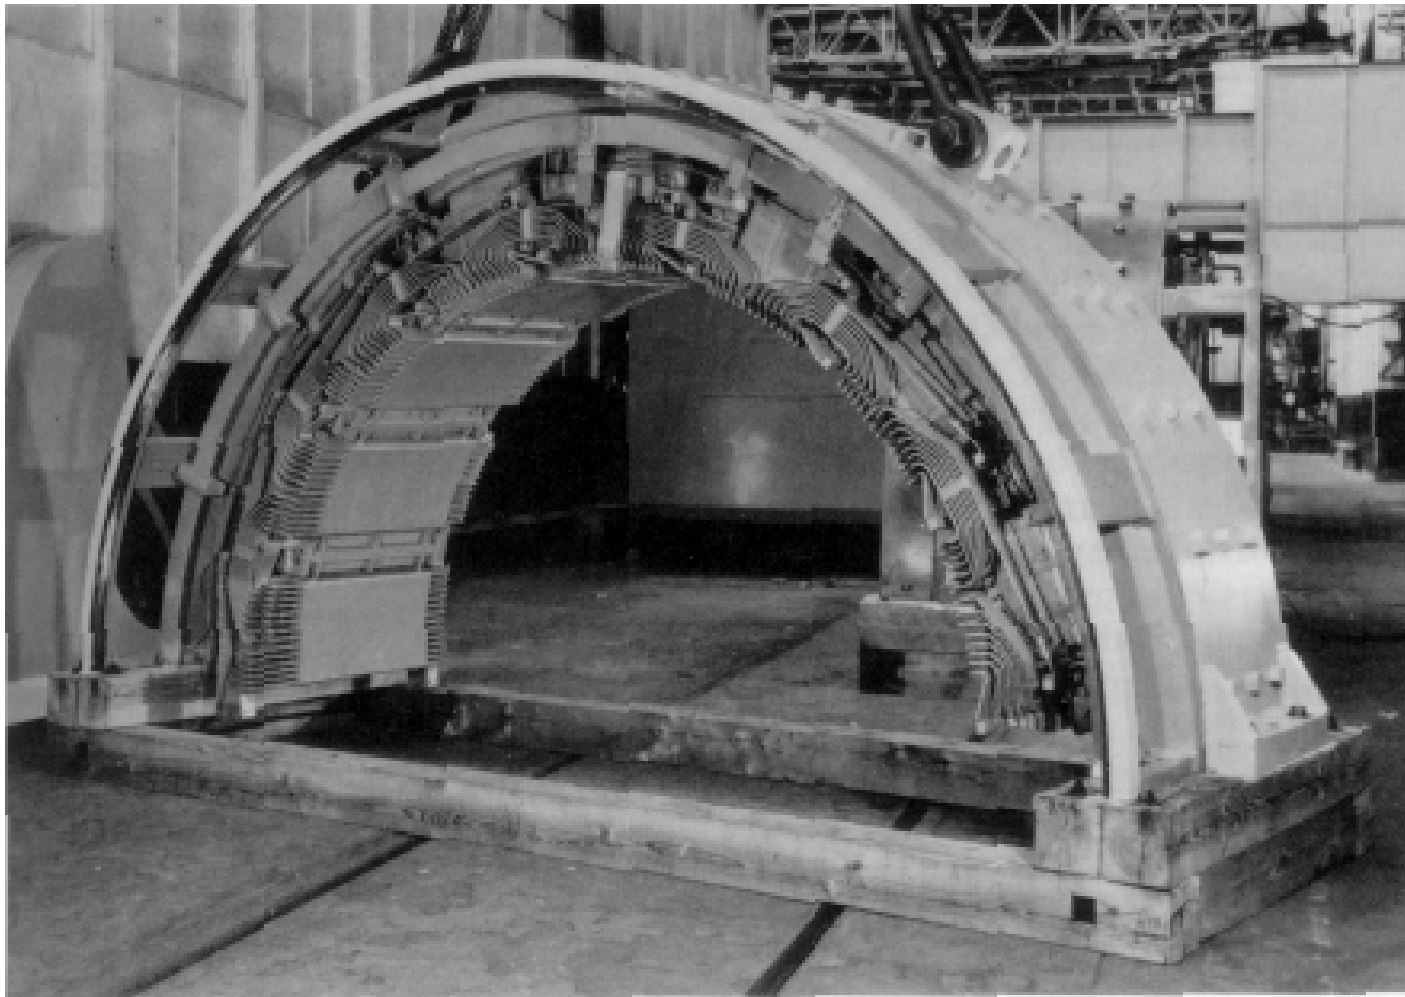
Typical large d.c. frame. (Courtesy: GEC Large Machines Ltd)
